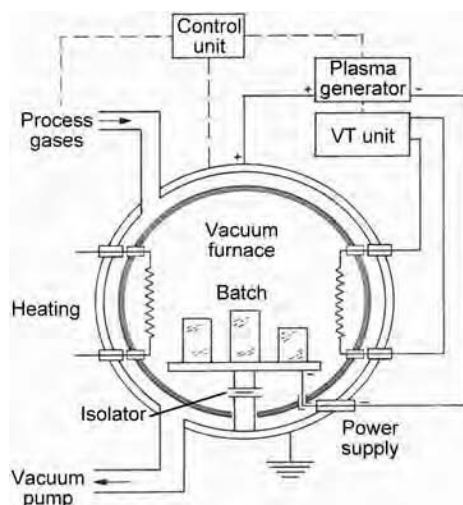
Schematic drawing of a plasma carburizing furnace. Courtesy of IPSEN International
